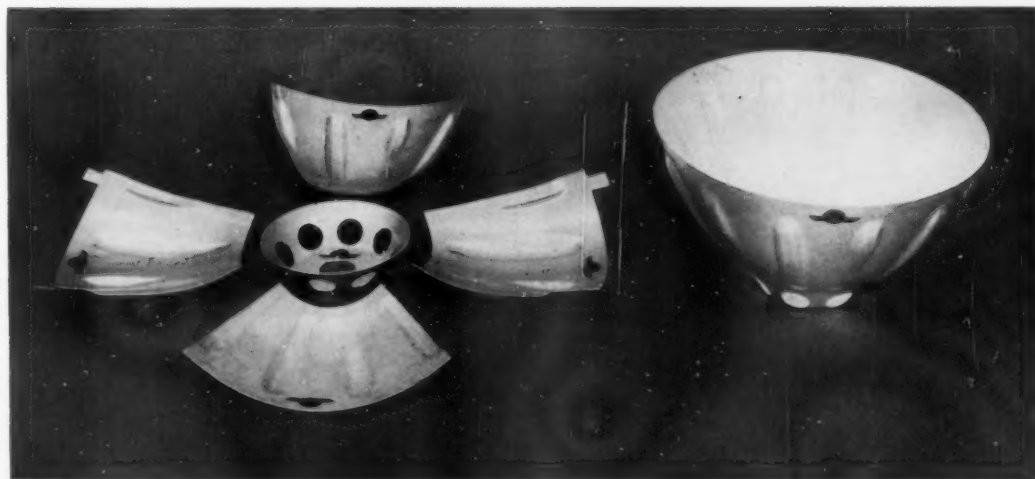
Aluminum nose cone, formerly produced as a five-piece welded assembly, left, is now produced as a one-piece part by explosive forming, right.
